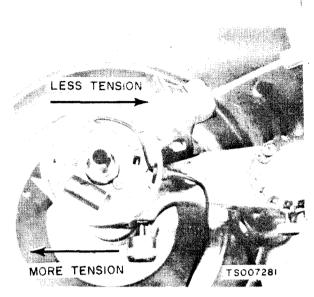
Checking and adjusting Breaker Point Spring Tension
